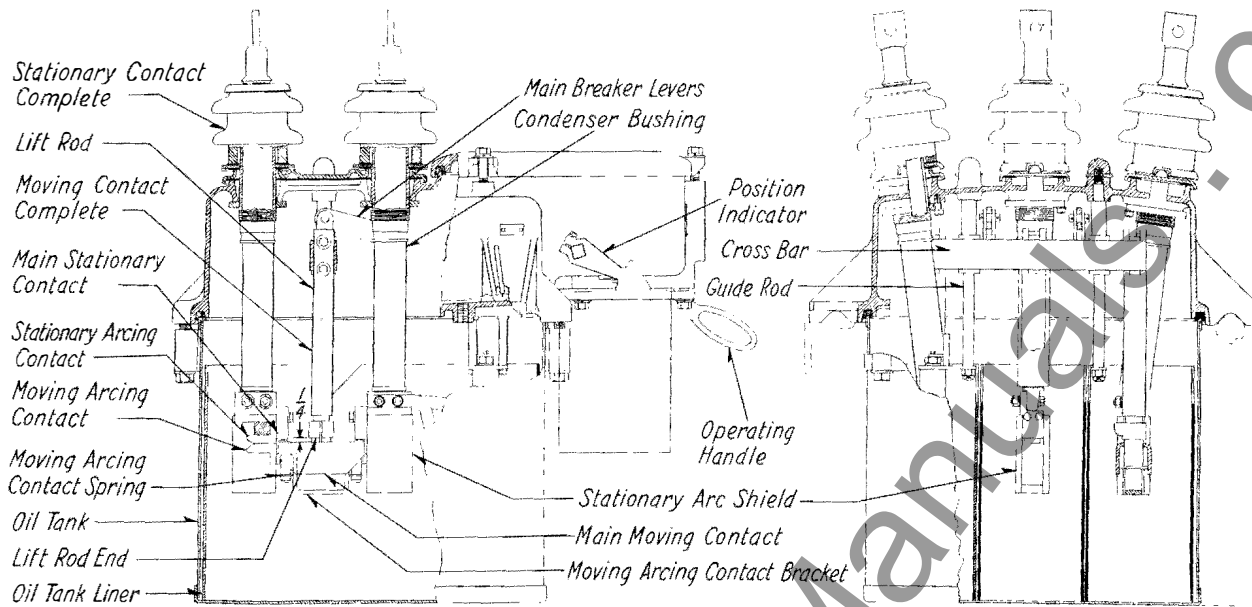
BREAKER UNIT WITH SERIES TRIP COILS
